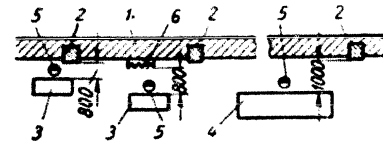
Clearance from Wall for Small, Medium and Large Machine Tools when Worker is Present between Machine Tool and Wall
